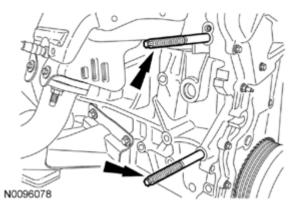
Locating Generator Studs Courtesy of FORD MOTOR CO.
